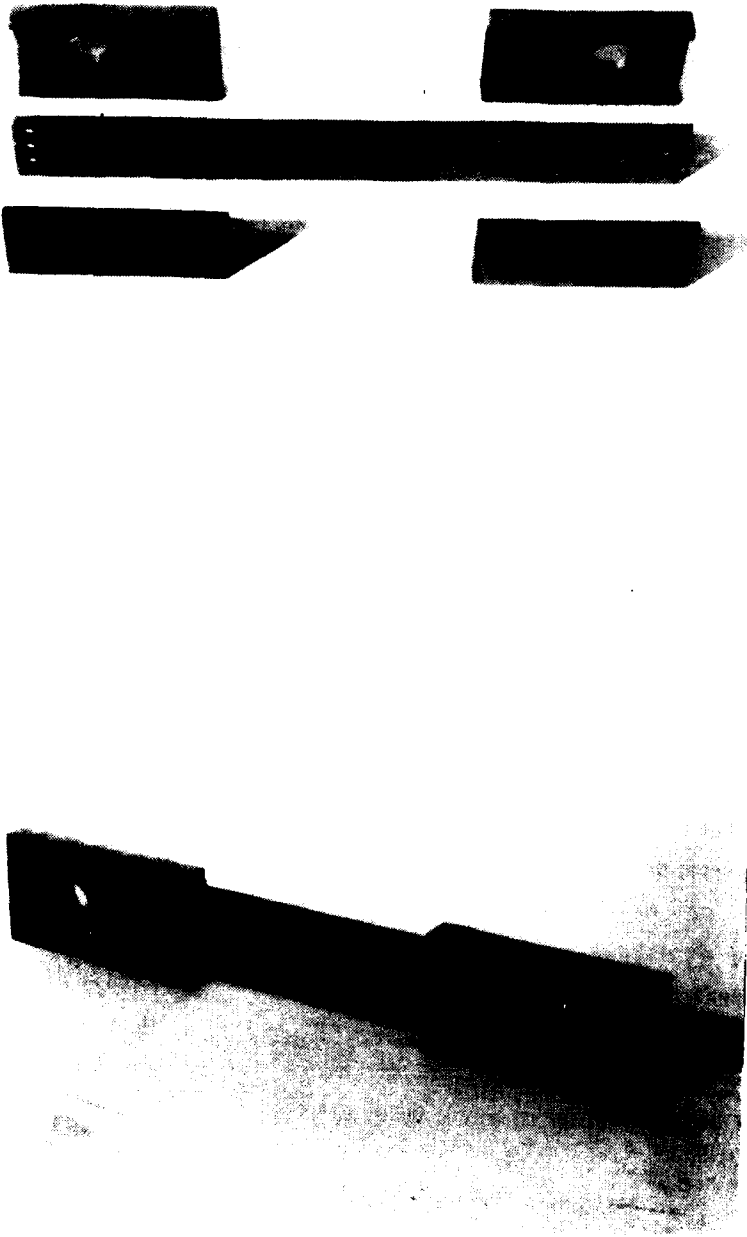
Photographs of the Preliminary Specimen used for 200 Hz Assembled and Disassembled
